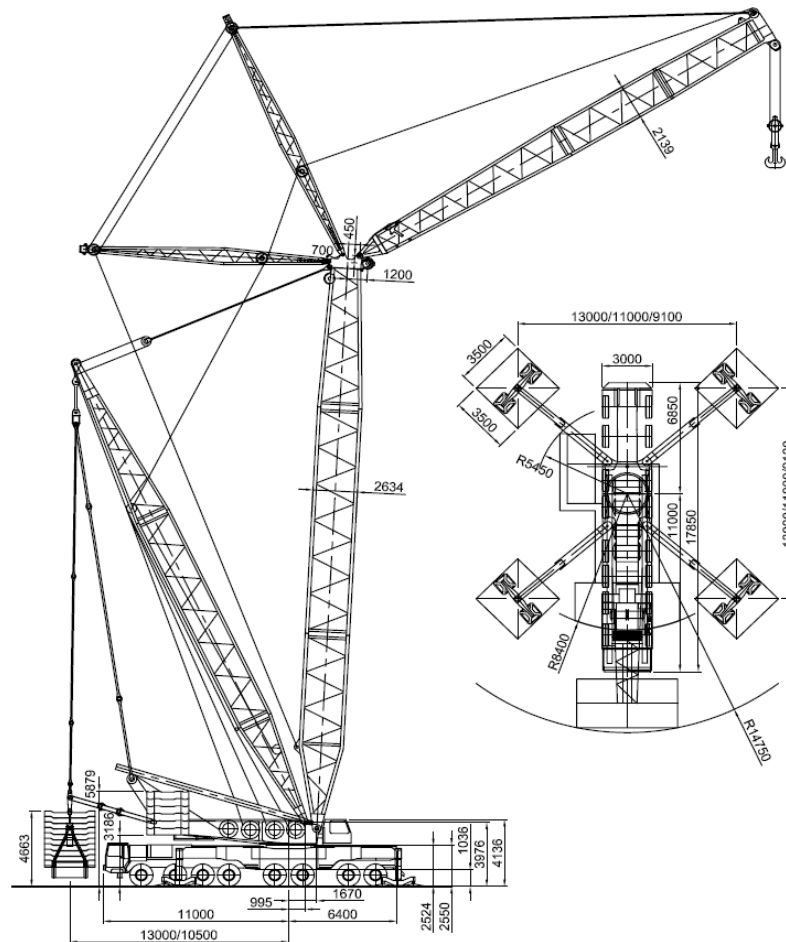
Liebherr LG-LGD 1550; dimensions in mm [78]
